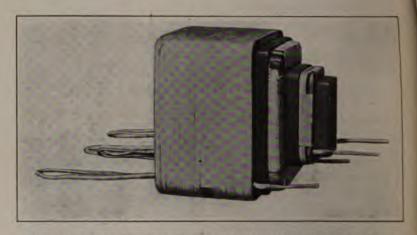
SHOWING RELATIVE POSITION OF COILS AND INSULATING TUBES
